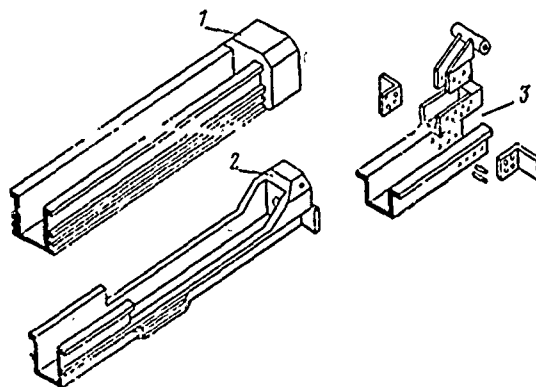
The Technology of Manufacturing "Monolithic" Constructions:
